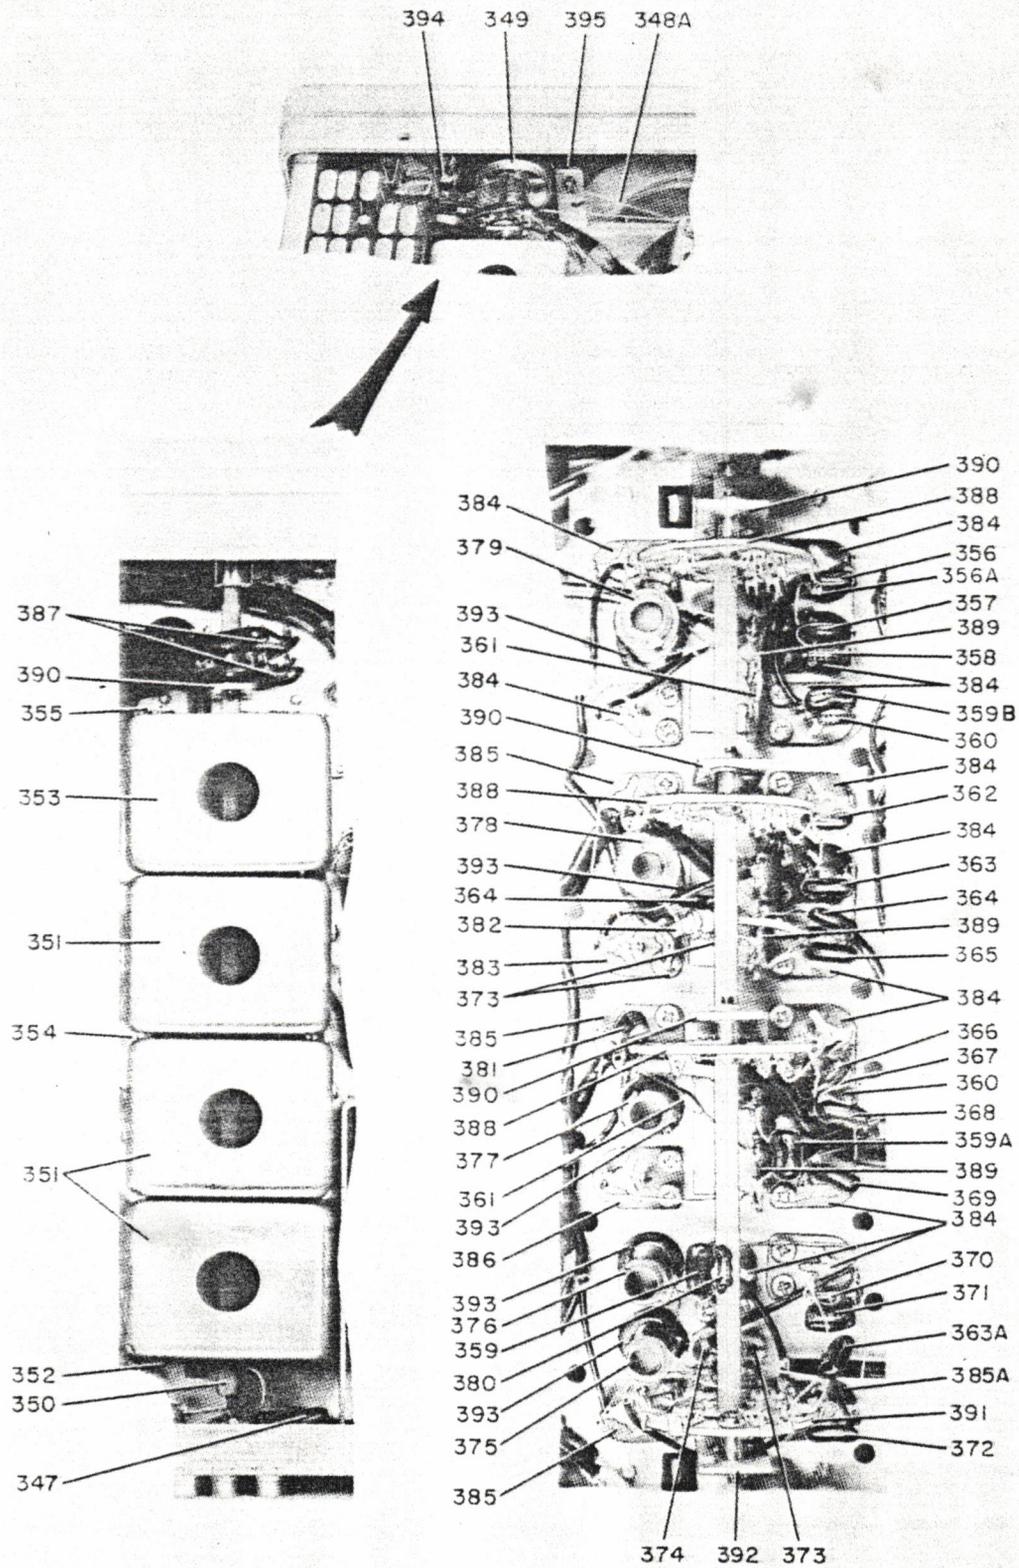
Transceiver Subassembly (Sheet 6 of 8)
